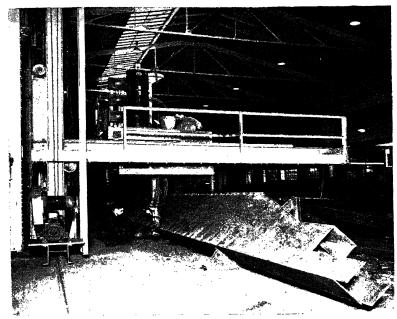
Crane-construction details. Box-section crane being welded by a Unionmelt automatic electric welder. This setup will weld a girder 150 ft. in length or a tank 16 ft in diameter. The special "walking-jib" crane supporting the unit was designed and built by Whiting for this work. (Whiting.)
